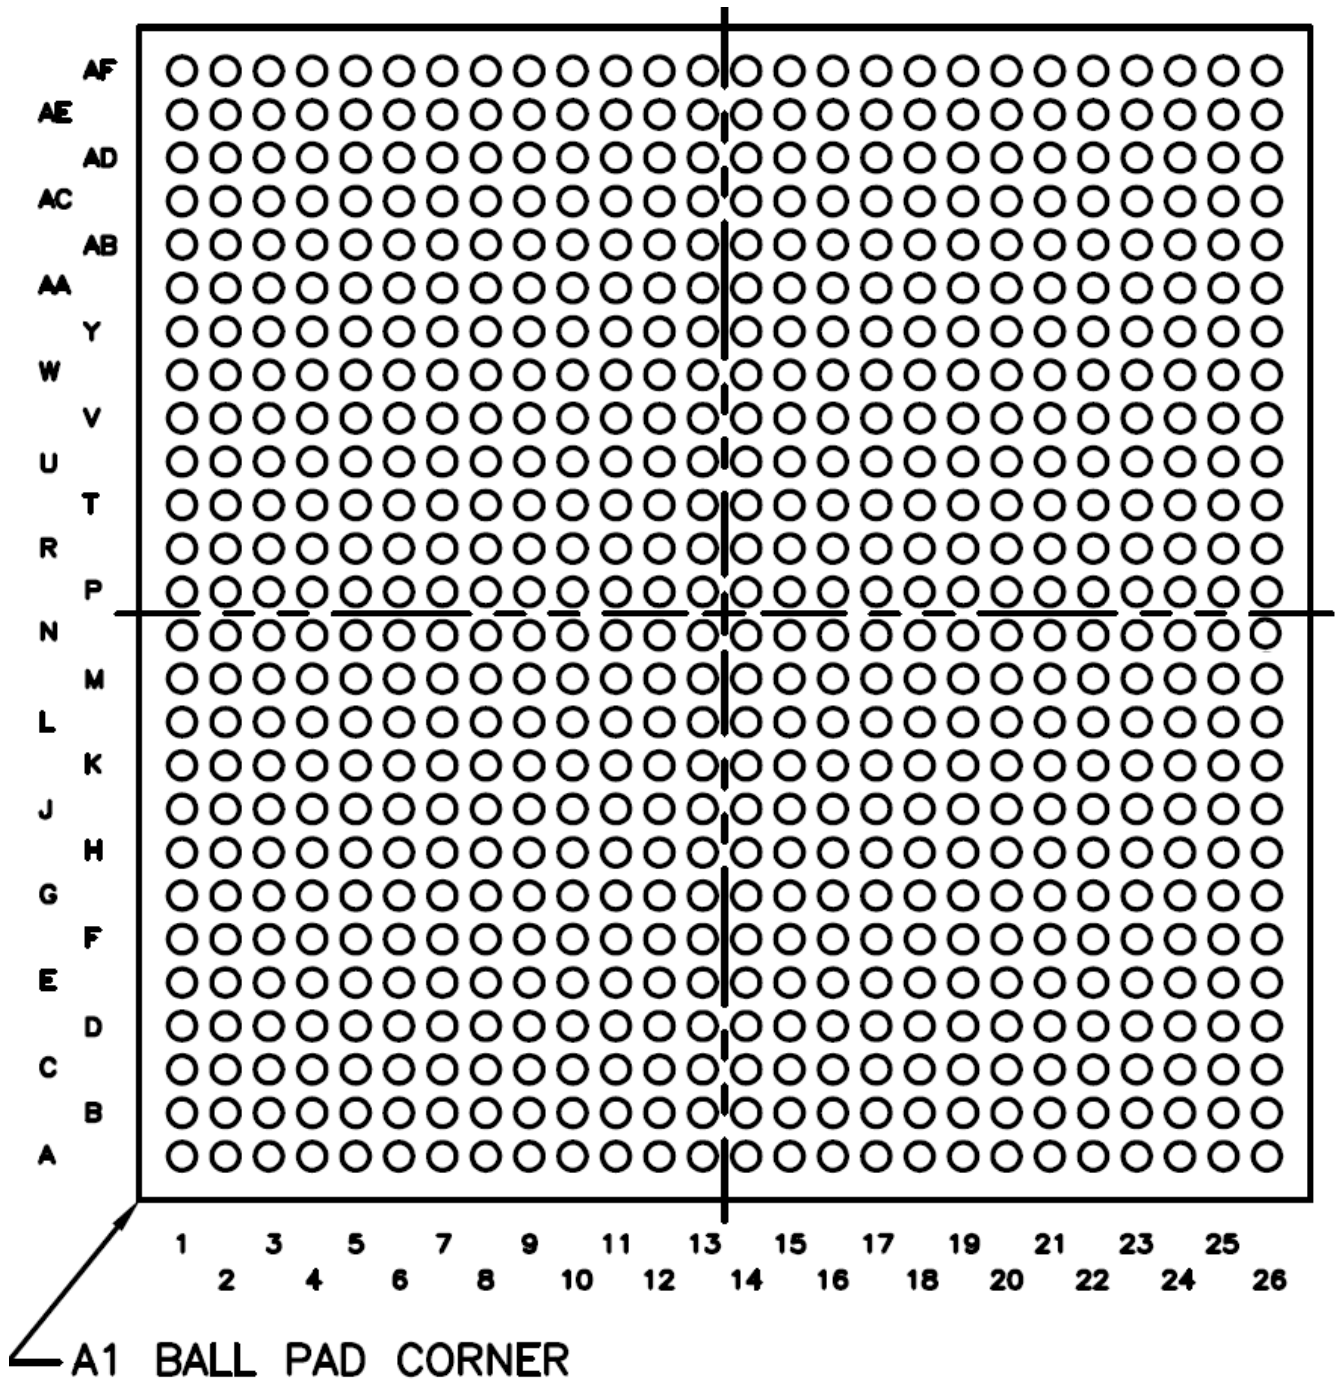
ZYR Package 676-Pin FCBGA Top View
